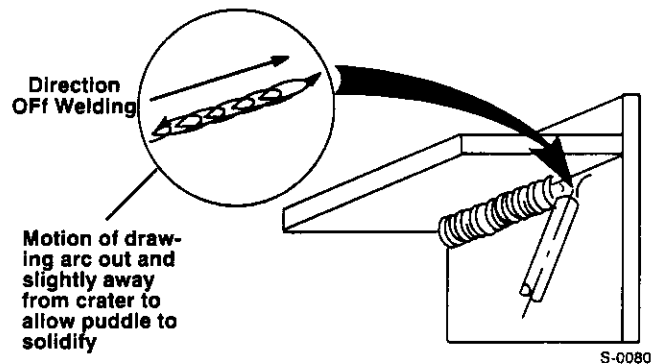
Overhead Weld Tee Joint – Single Pass
